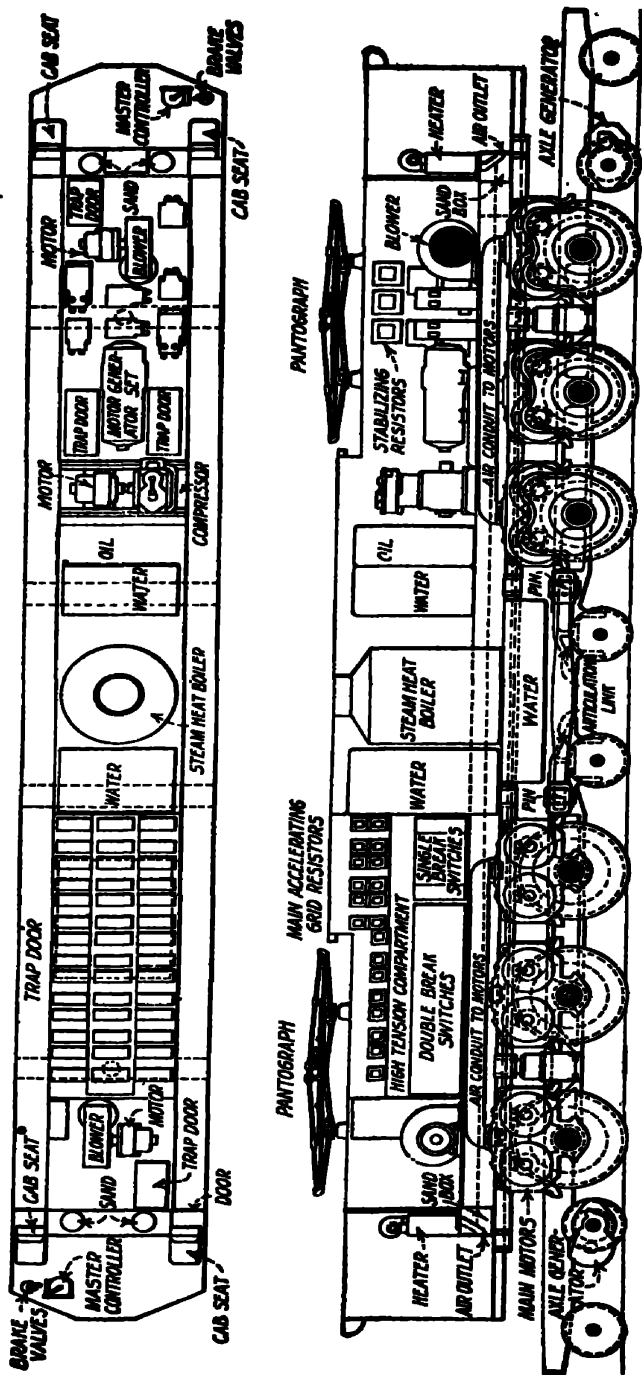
Elevation and Plan Showing Arrangement of Equipment on Quill-Drive Locomotive of Chicago, Milwaukee and St. Paul Railway
